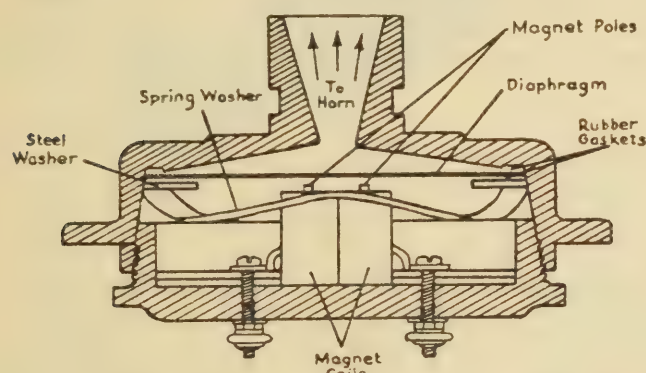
CROSS SECTION VIEW OF SOUND UNIT (HORN TYPE).
